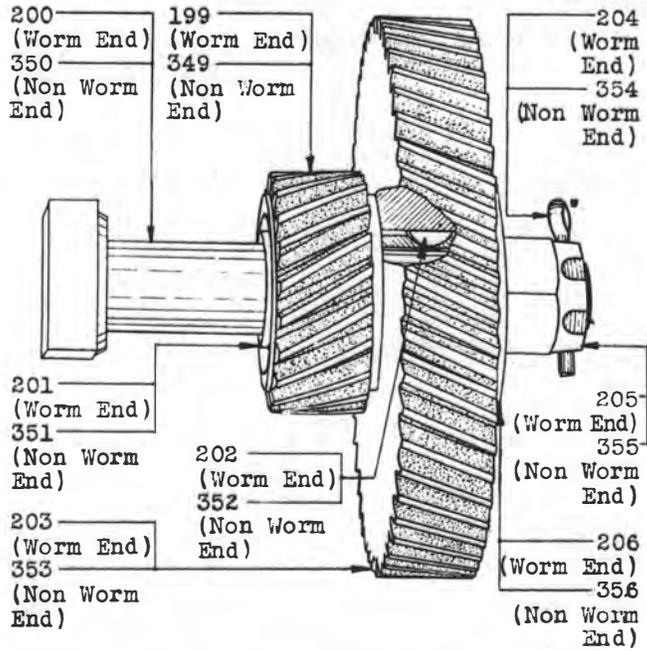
Intermediate Gear Assembly and Associated Parts
